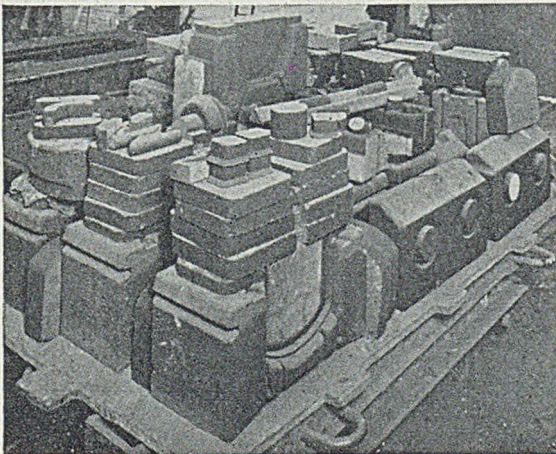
Set of Completed Cores for the Diesel-engine Frame Casting.
